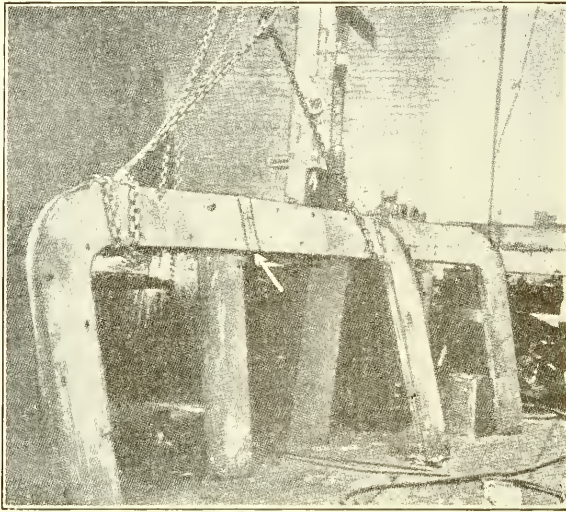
Brass Rudder Frame Salvaged by Welding.
